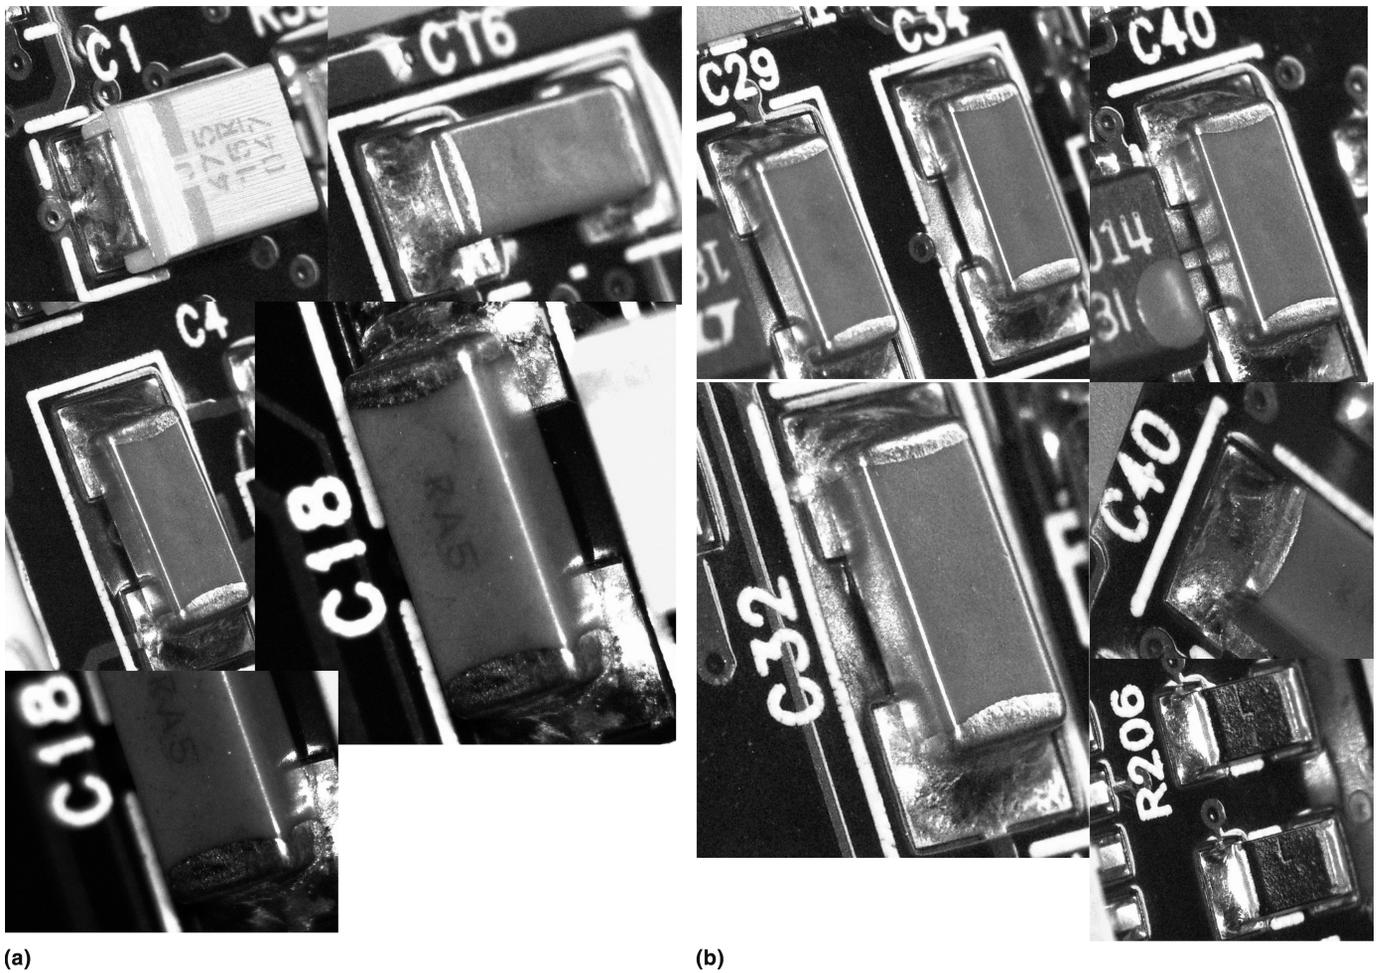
Photographs of the capacitor solder joints and resistor solder joints taken after 1675 thermal cycles.
